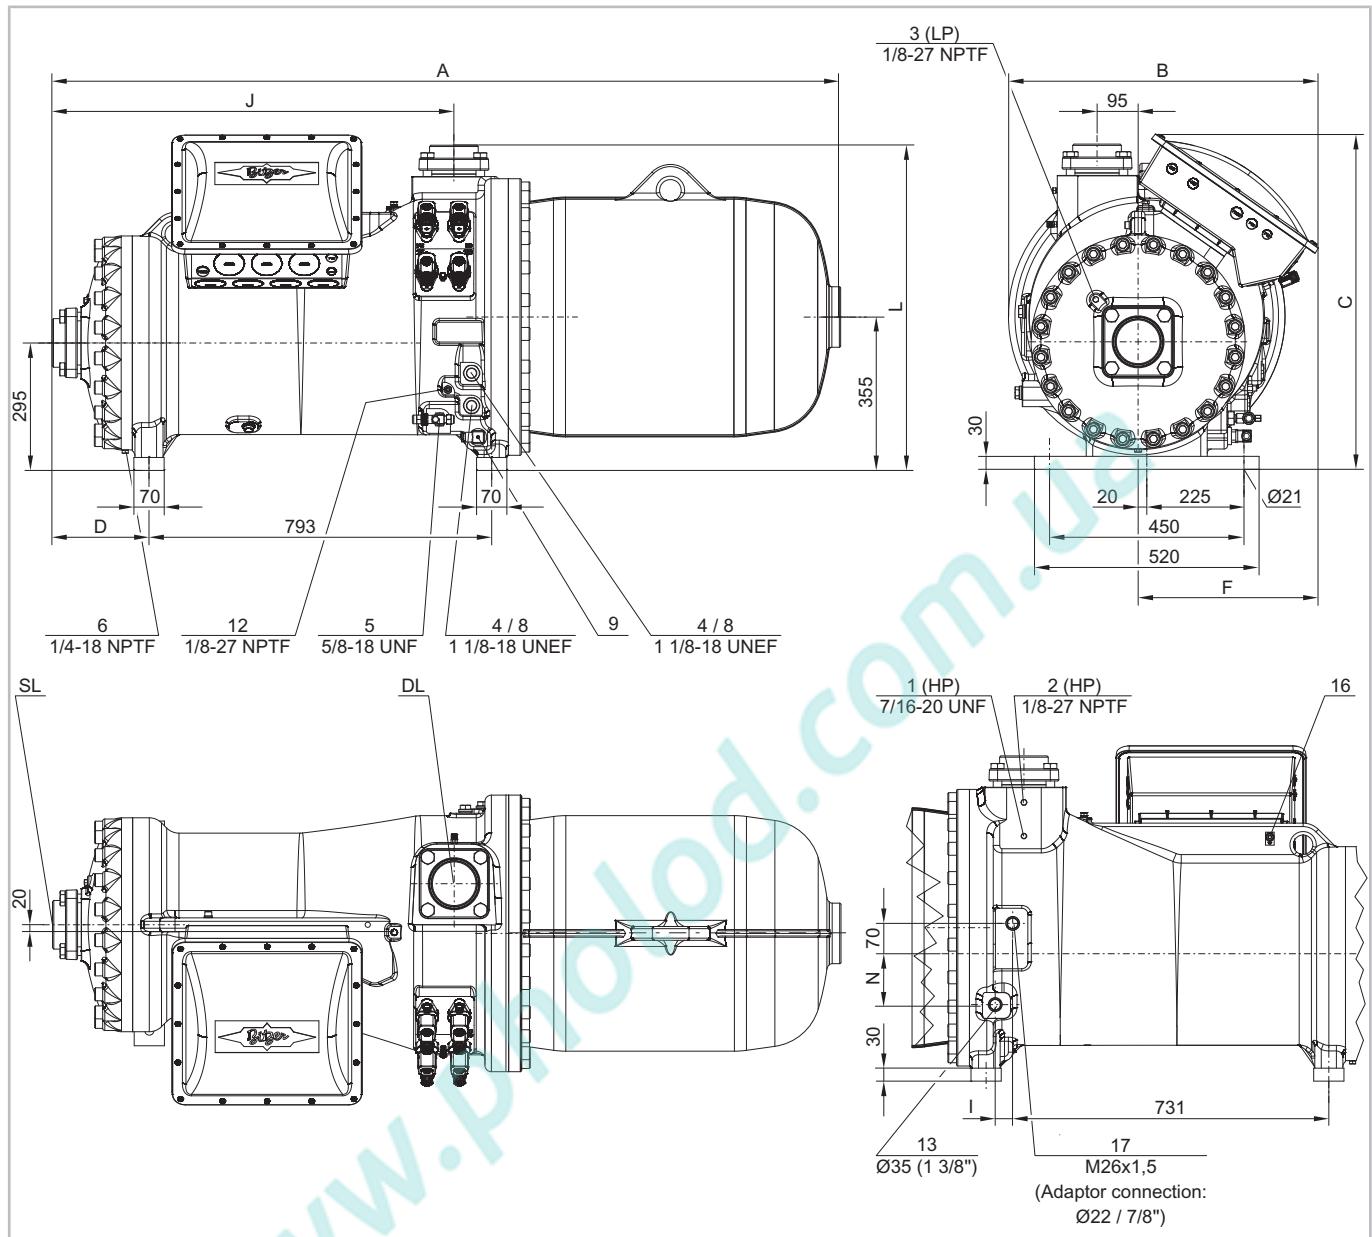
Dimensional drawing CSW9563-140Y .. CSW95113-320(Y), CSH9663-160Y .. CSH96113-320Y
